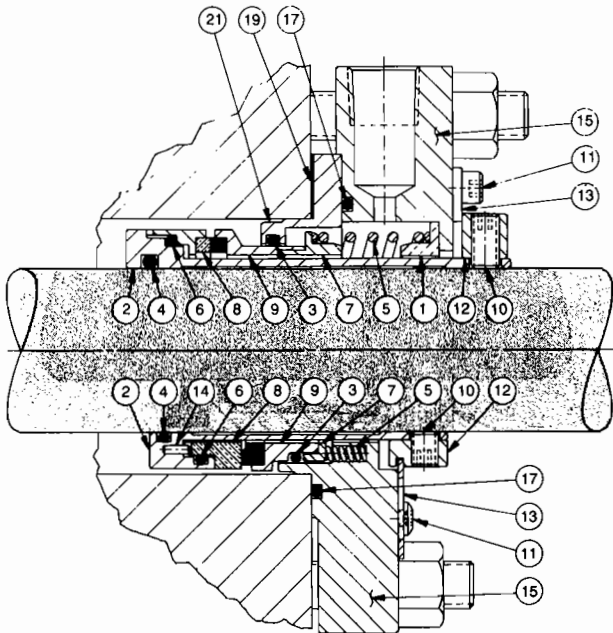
Typical Type "B" Seals: Single Spring Stationary Seal (Bottom). Note That Rotating Parts Carry Even, Stationary Parts Carry Odd Numbered Designations.
